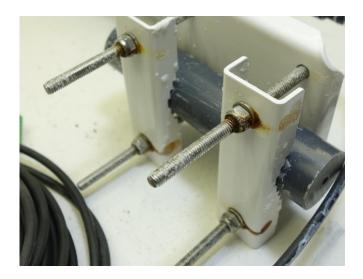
Specimen no. 50-18-0403-8b after the salt mist test
